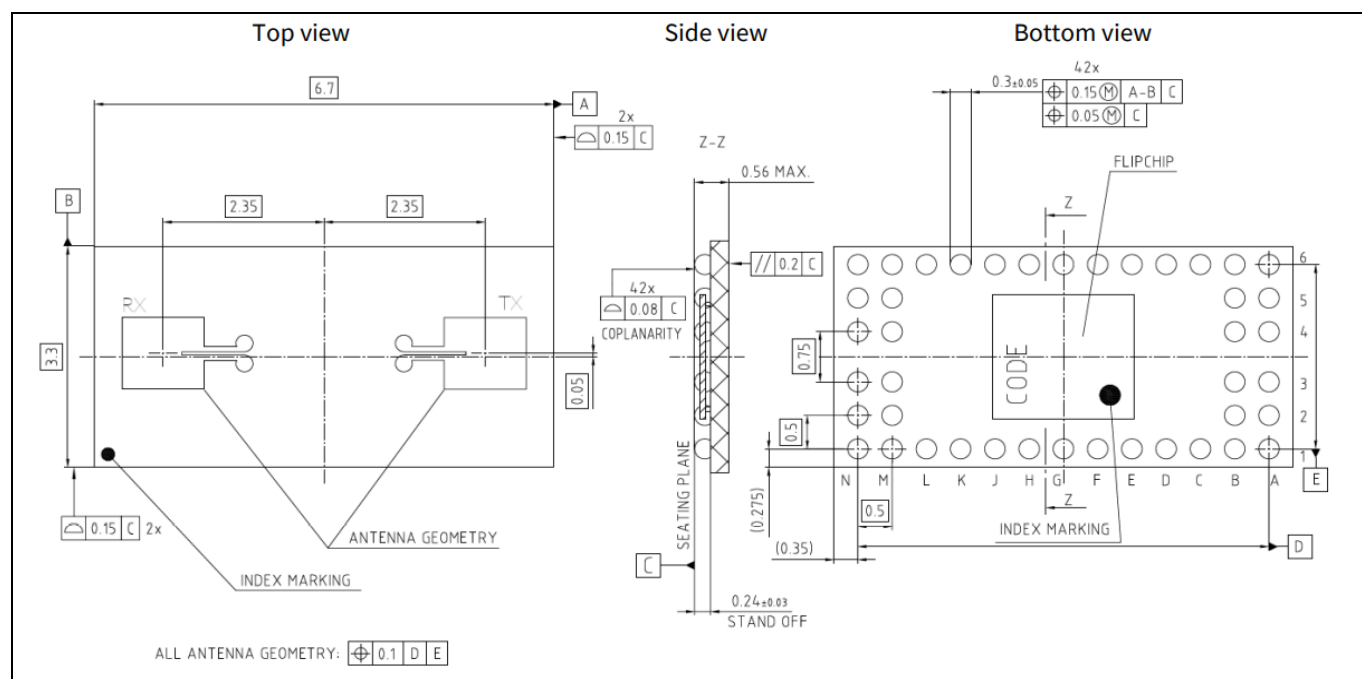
Top, side, and bottom views of BGT60LTR11AIP MMIC package (dimensions in mm)
